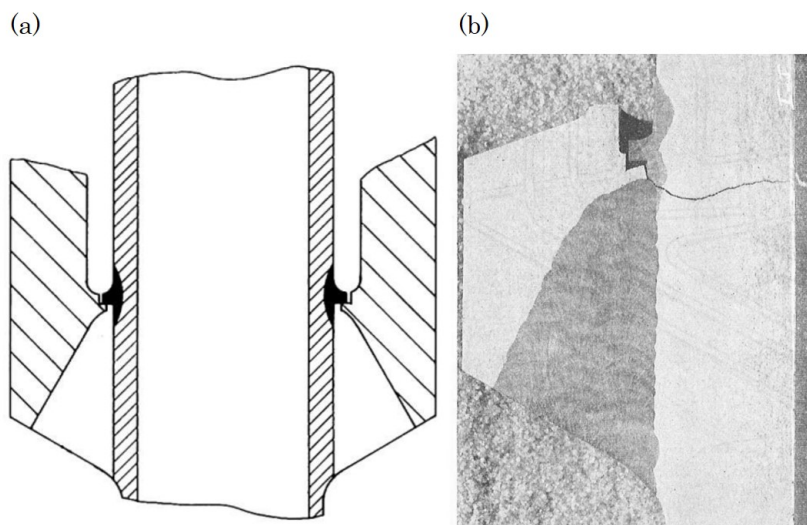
SRC of a 347 slip joint used in steam turbine generator at 565 °C after 16 months of service with (a) schematic sketch of the welded joint and (b) macrographic cross-section image of failure [17] .
